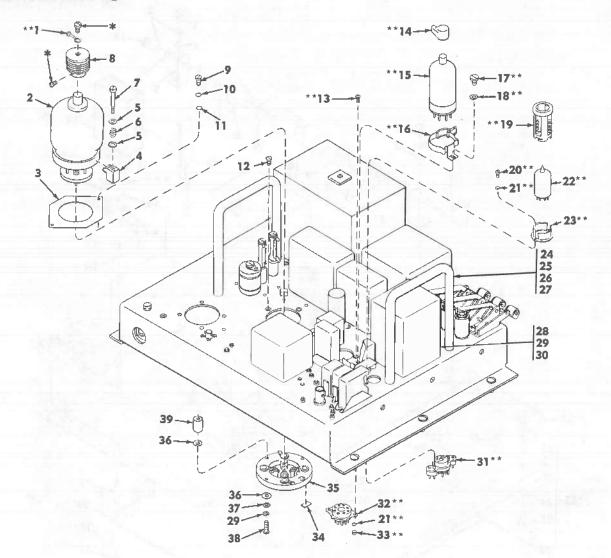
CONTROL, ANTENNA C-1495/M /8012250/-PARTIAL EXPLODED VIEW
